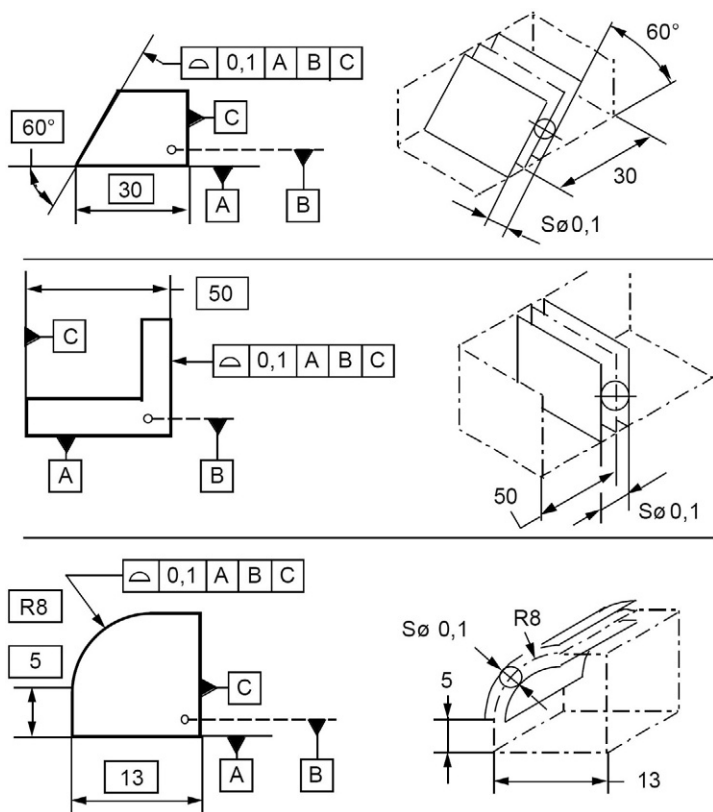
Profile surface tolerances for the location of integral surfaces
